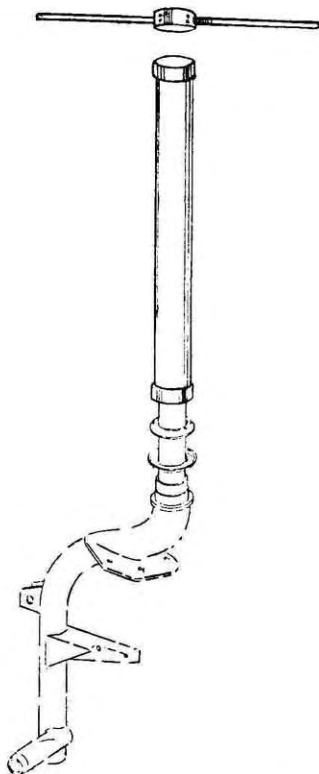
Mounting the Bottom Race of the Bottom Bearing.
